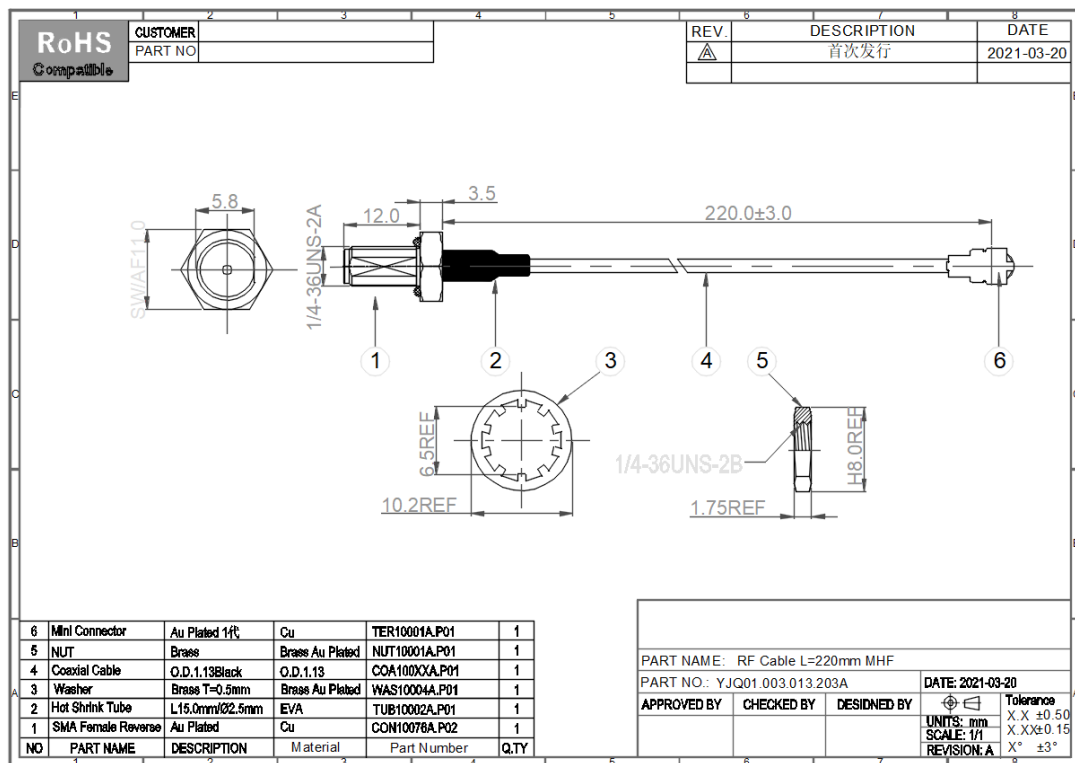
U.FL-to-RPSMA Coax RF Cable dimension
